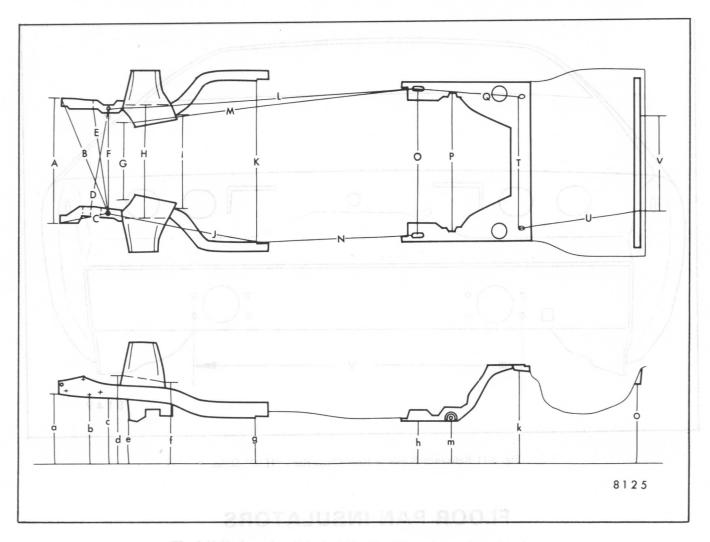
Horizontal and Vertical Checking Dimensions - "H-07" Styles
